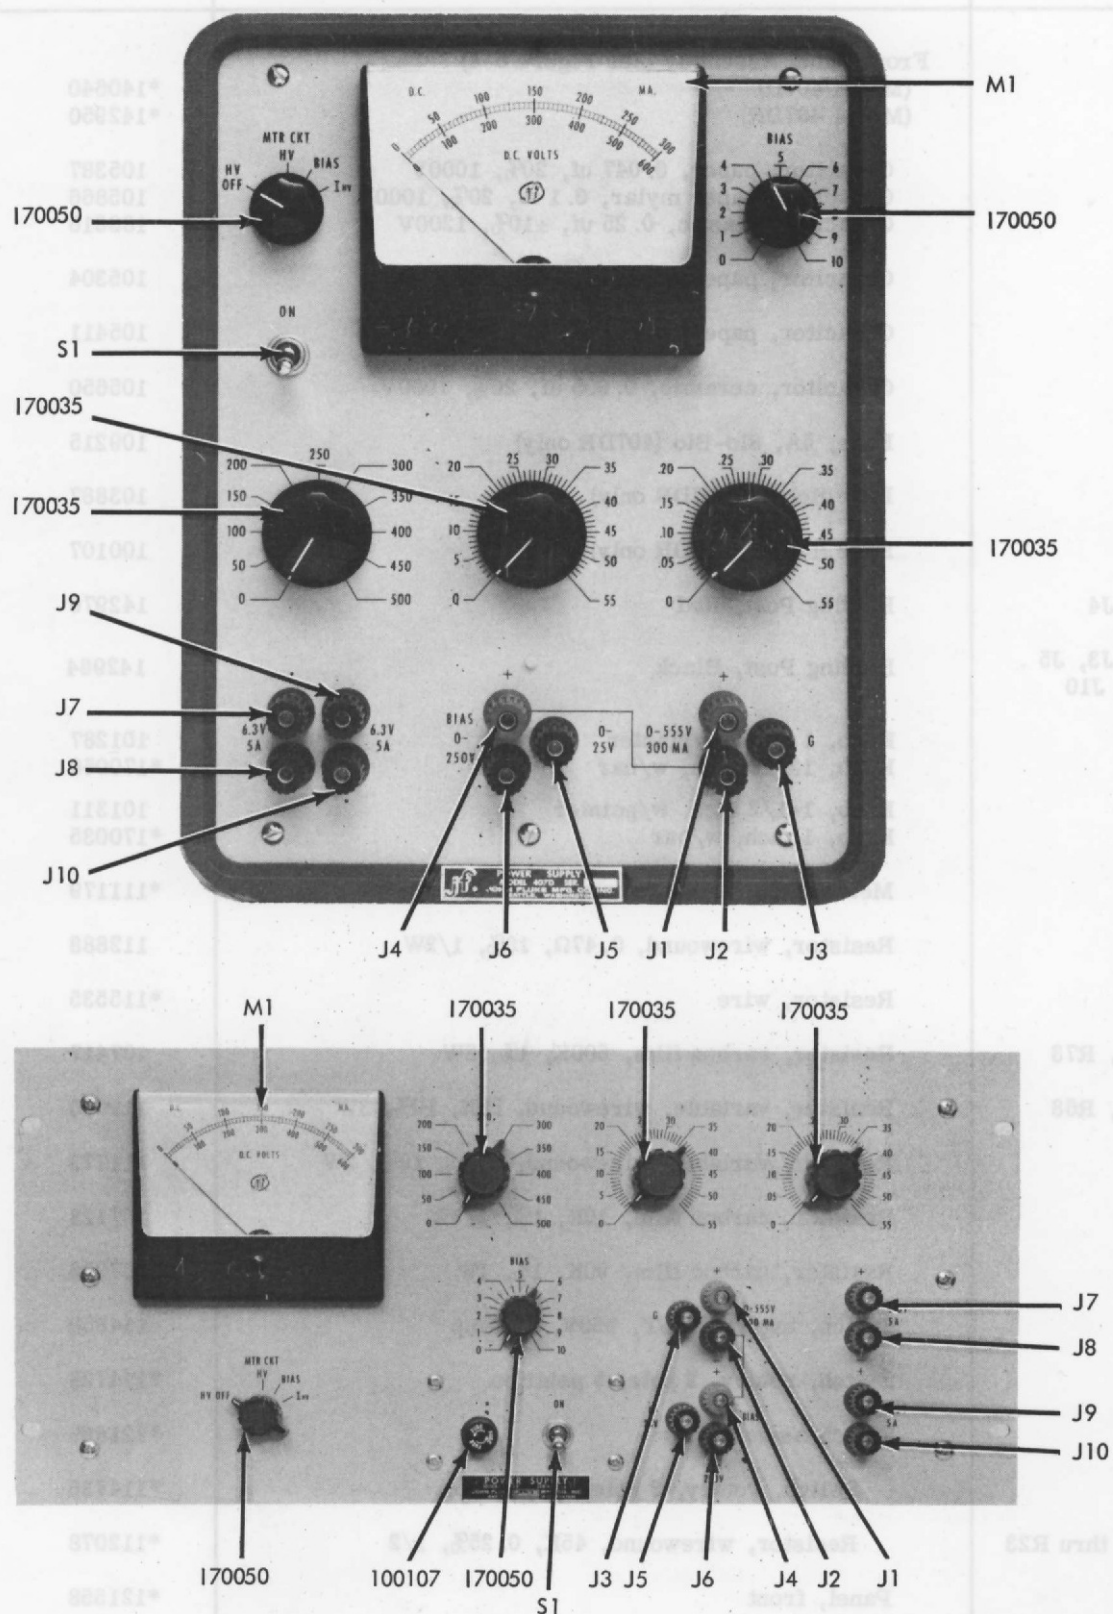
FRONT PANEL ASSEMBLY (sheet 1 of 2)
